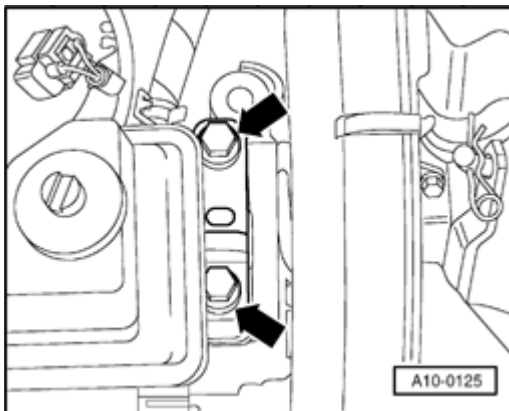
Locating Engine Carrier Bolts (Engine Side)
